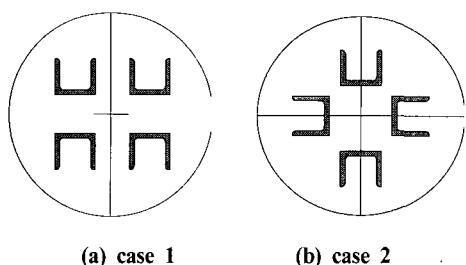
U-shape extrusion with 4 holes for different arrangements
